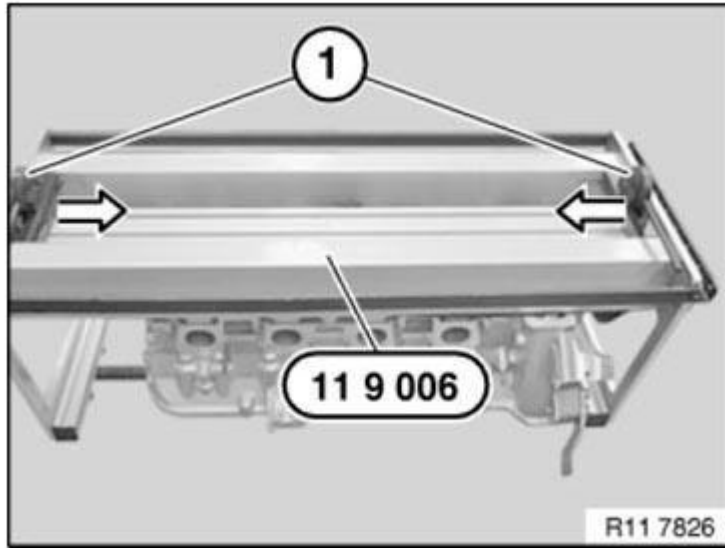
Sliding Locks In Direction Of Arrow And Pretension With Eccentric Shaft
